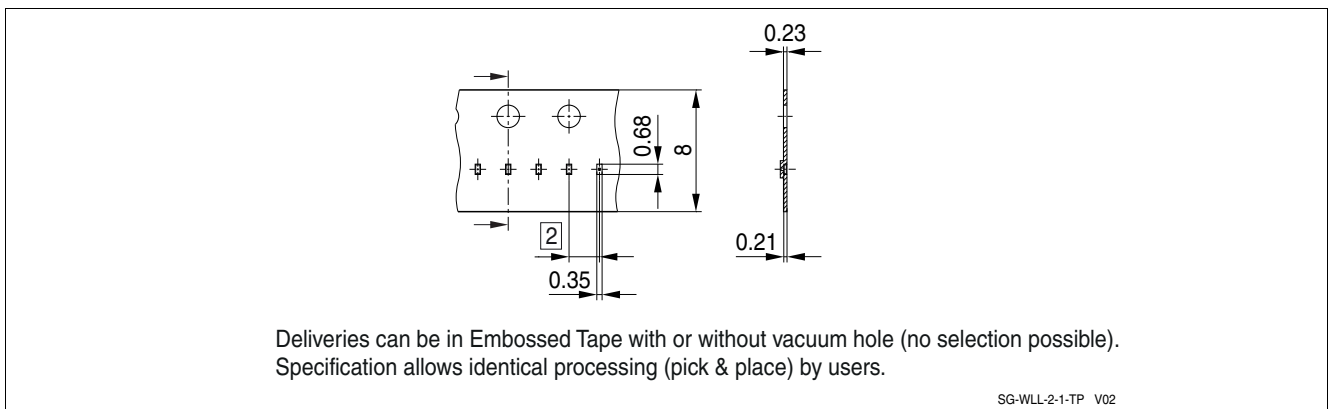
WLL-2-1 Packing (dimension in mm)
